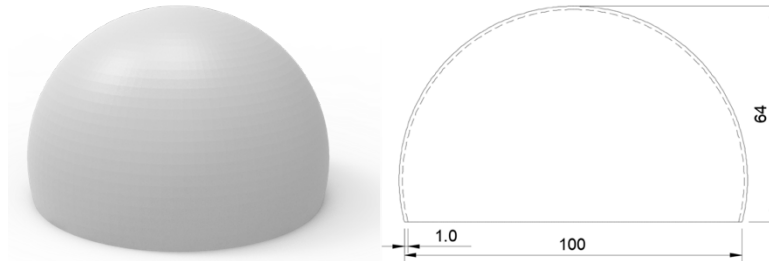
3D model and dimension (mm) of the semi-spherical sample printed.
